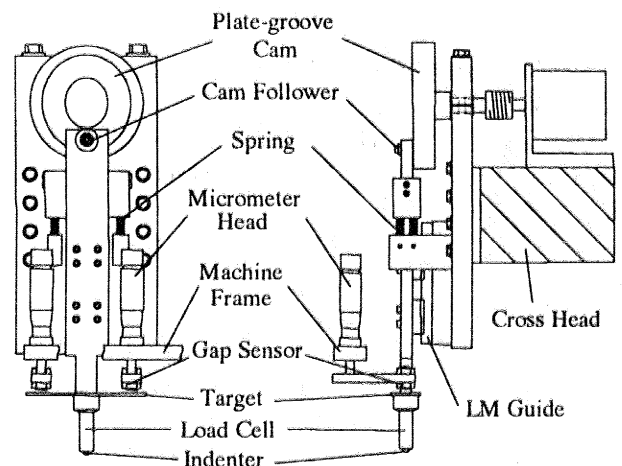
Front and Side View of Measuring Part of Continuous Hardness Testing Machine
